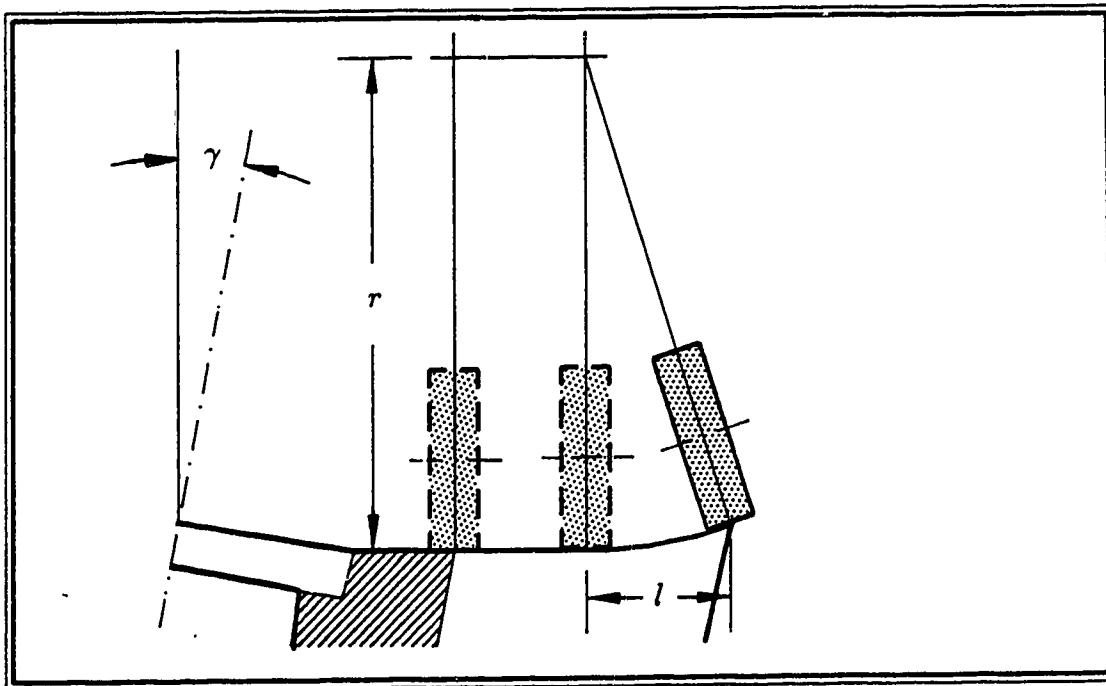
Grinding wheel assembly is rotated as well as translated
